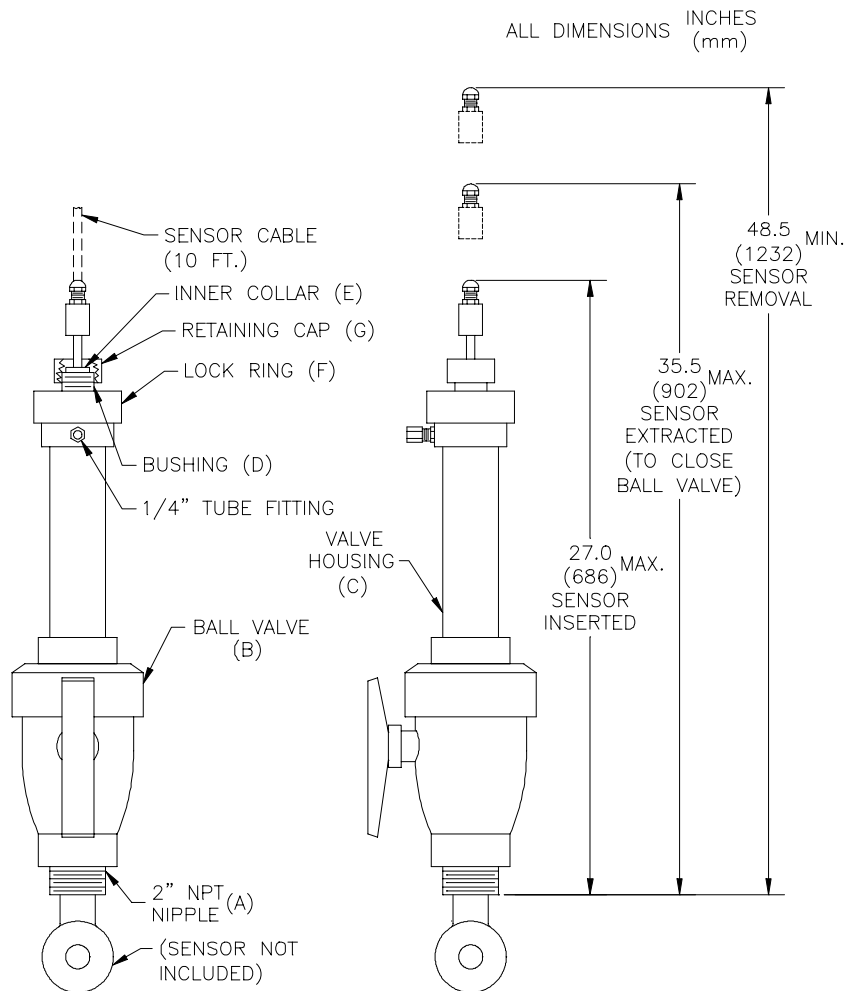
Insertion (Ball Valve) Mounting Hardware Details
